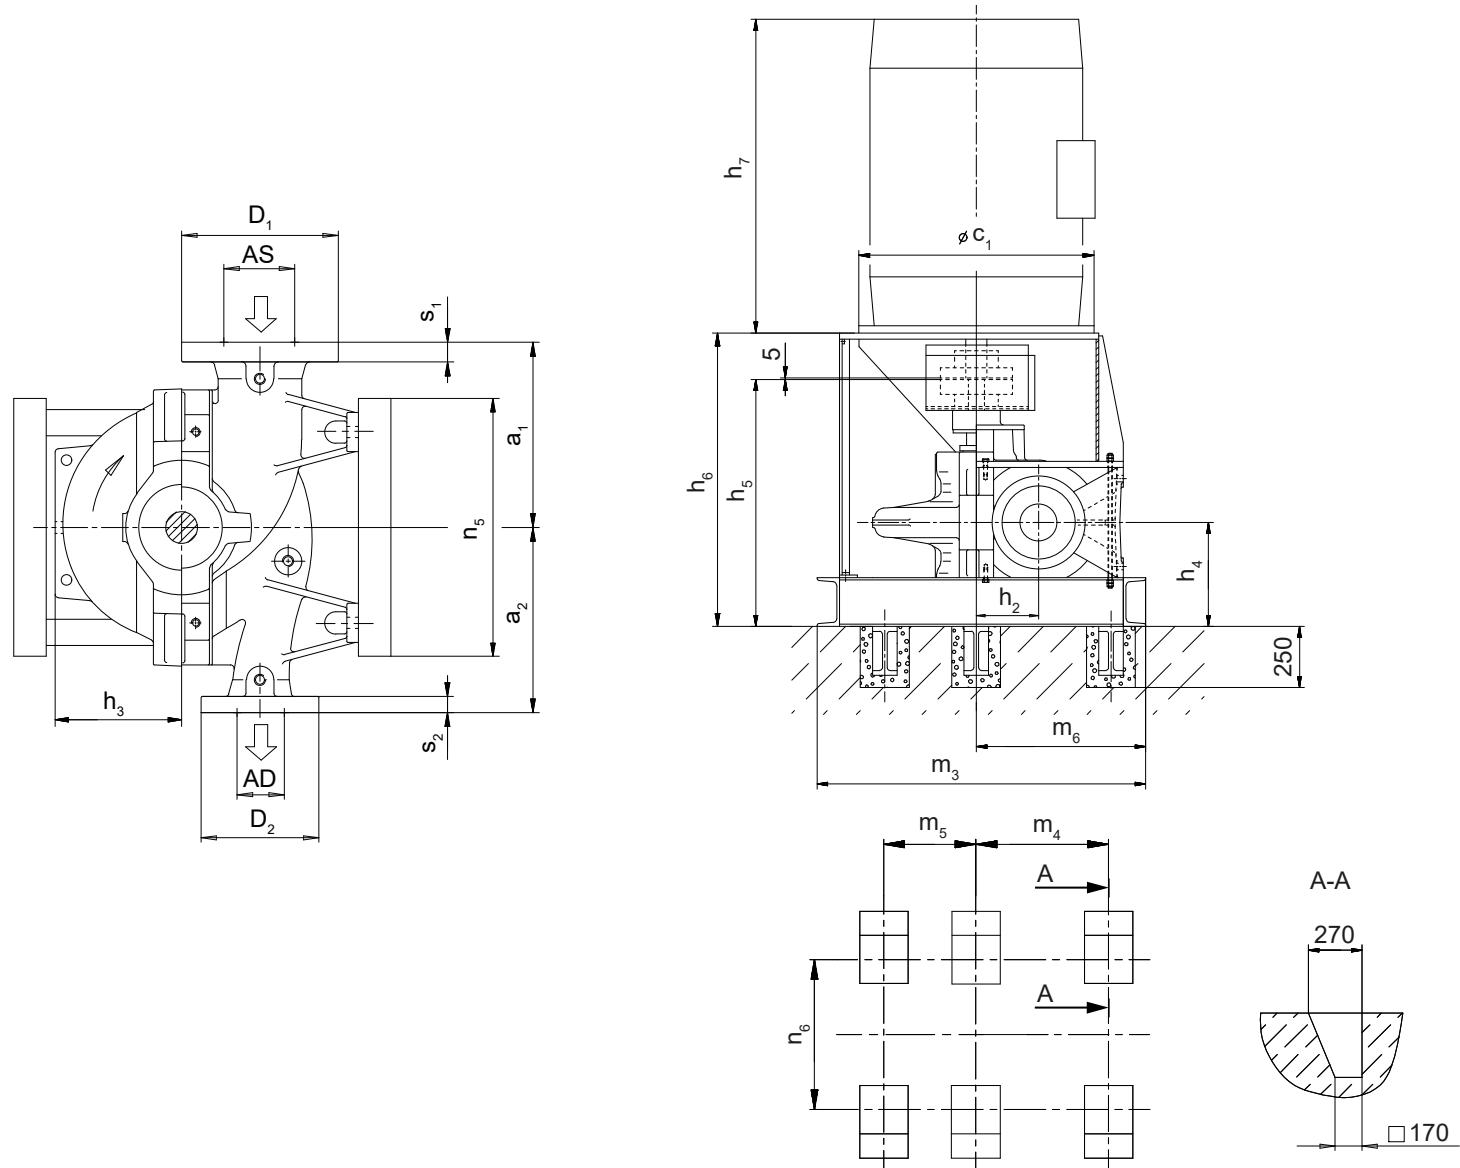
DK installation (6 foundations bolts), dimensions in [mm]
